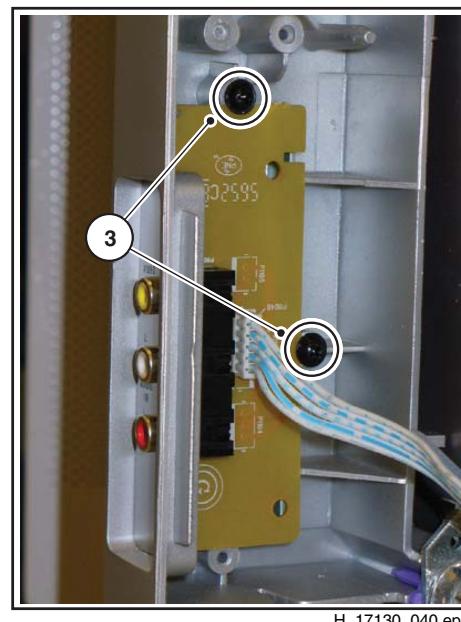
Side-IO/Keyboard panel removal (SL5 styling)
